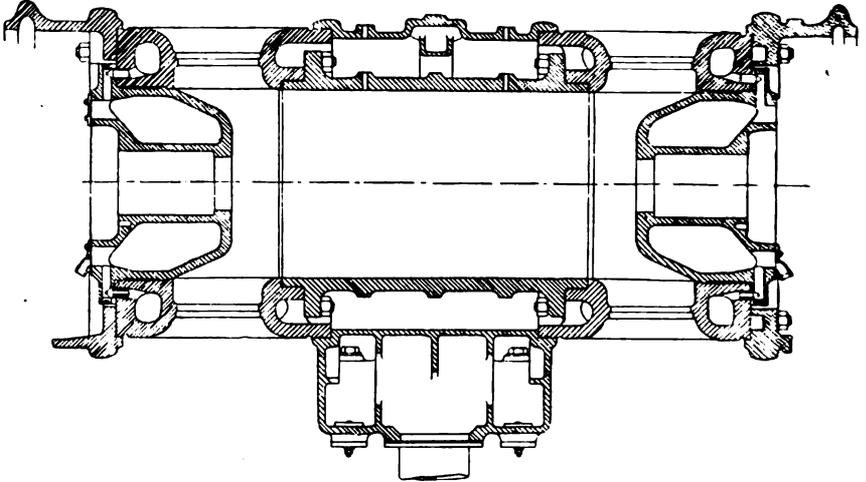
Section of Cylinder, Gasmotoren Fabrik Deutz.
